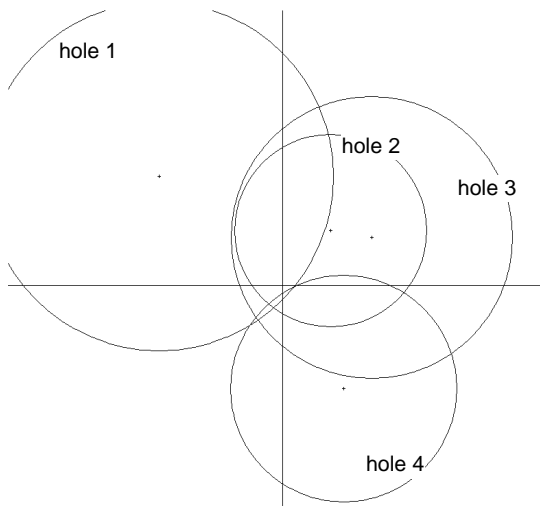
Case 2 paper gaging (MMR only on holes)
